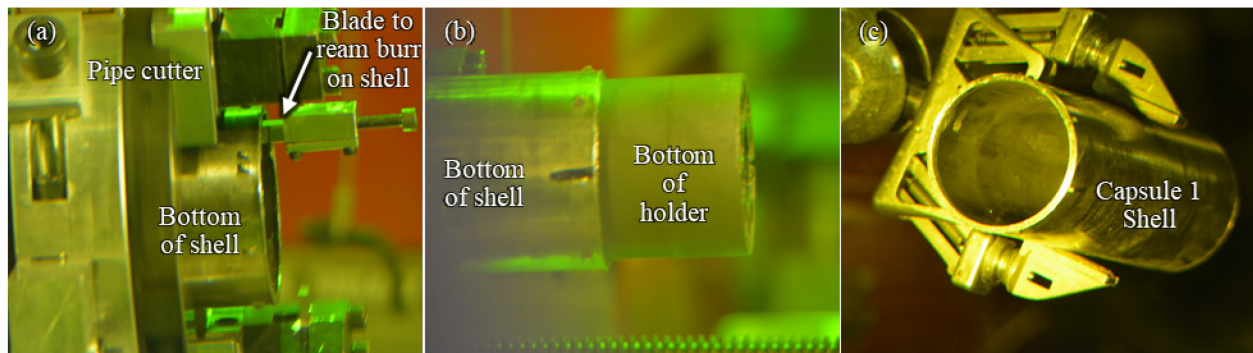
Blade attached to the pipe cutter drive to ream and remove the burr on the shell (a); Initial pushout of the Capsule 1 holder from the stainless-steel shell (b); partial interior view of the shell (c).
